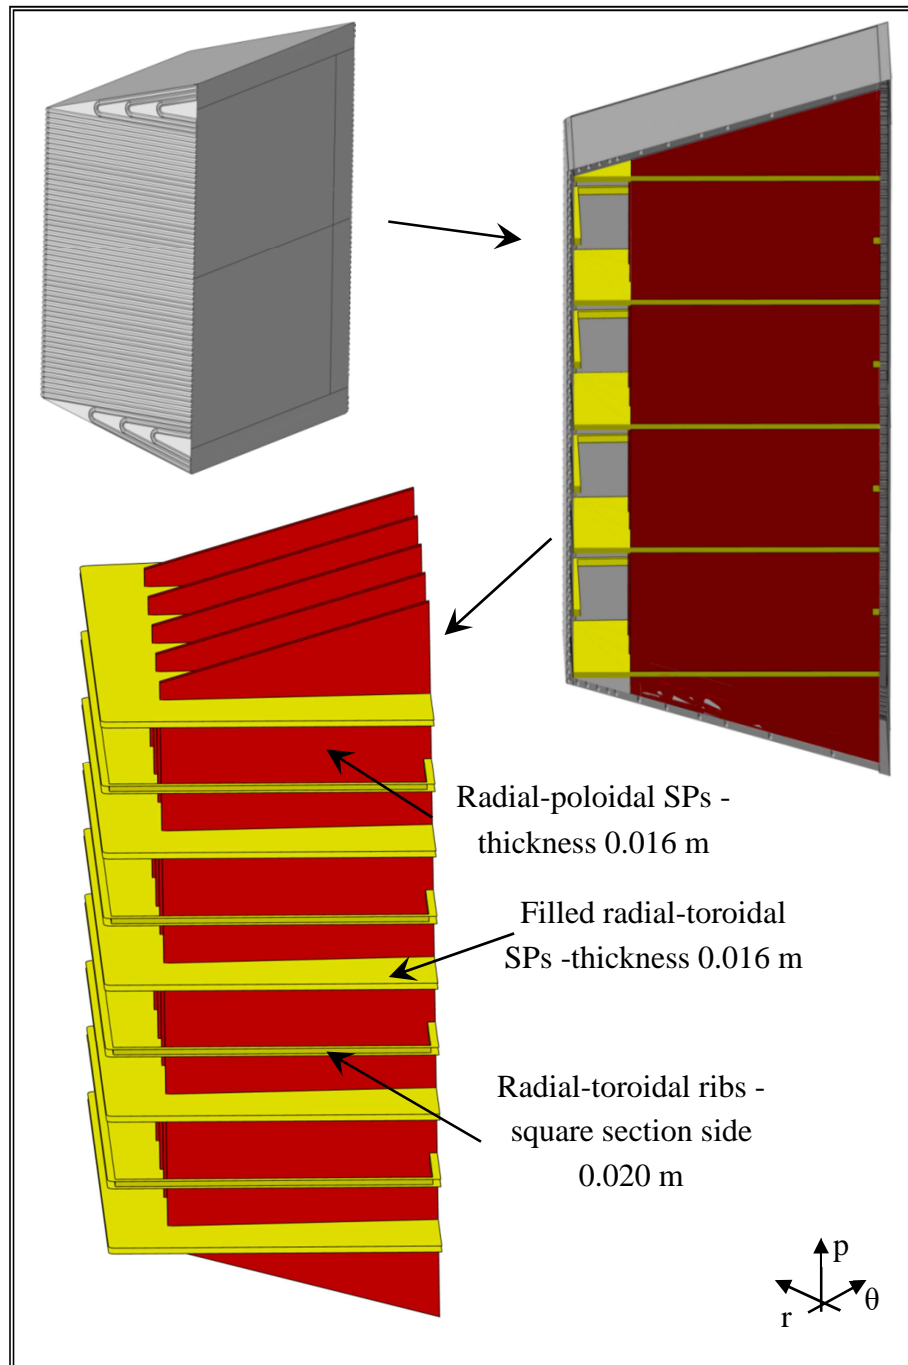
Configuration 3 - Case 2 – 3D geometric model exploded view.
